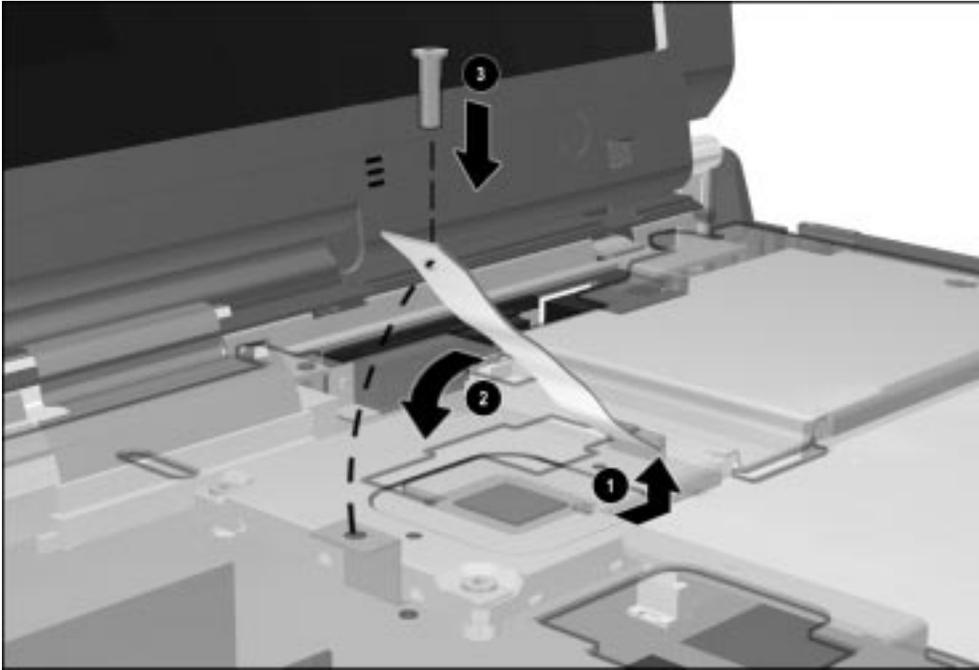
Installing the Heatpipe Mount Leaf Spring
